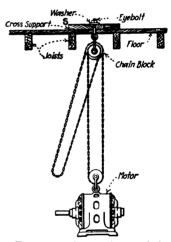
Supporting a chain block from a timber laid across the floor above.
